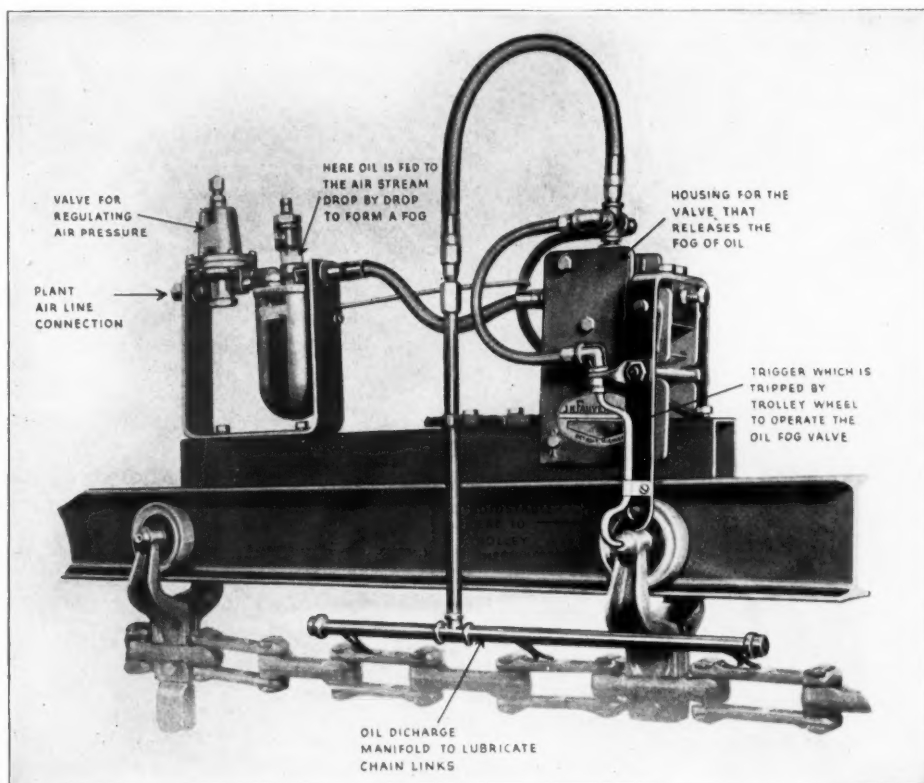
Application of an automatic conveyor lubricator showing controls, and leads to conveyor trolley wheels and chain links.
